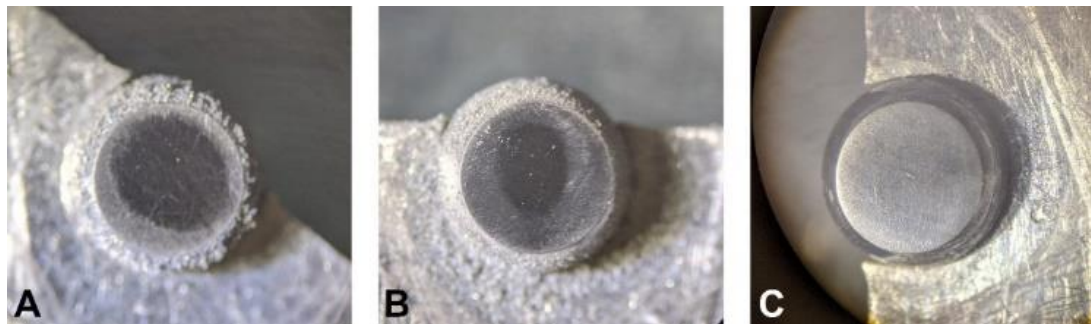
WC ball polishing. With: A – big fossa in the centre after grinding, B – smaller fossa and C – final shining cross-section. The WC ball sits in the recess in the metal plate which allows applying more force on the ball during the hand polishing process. The excessive WC material particles can be seen in A and B.
